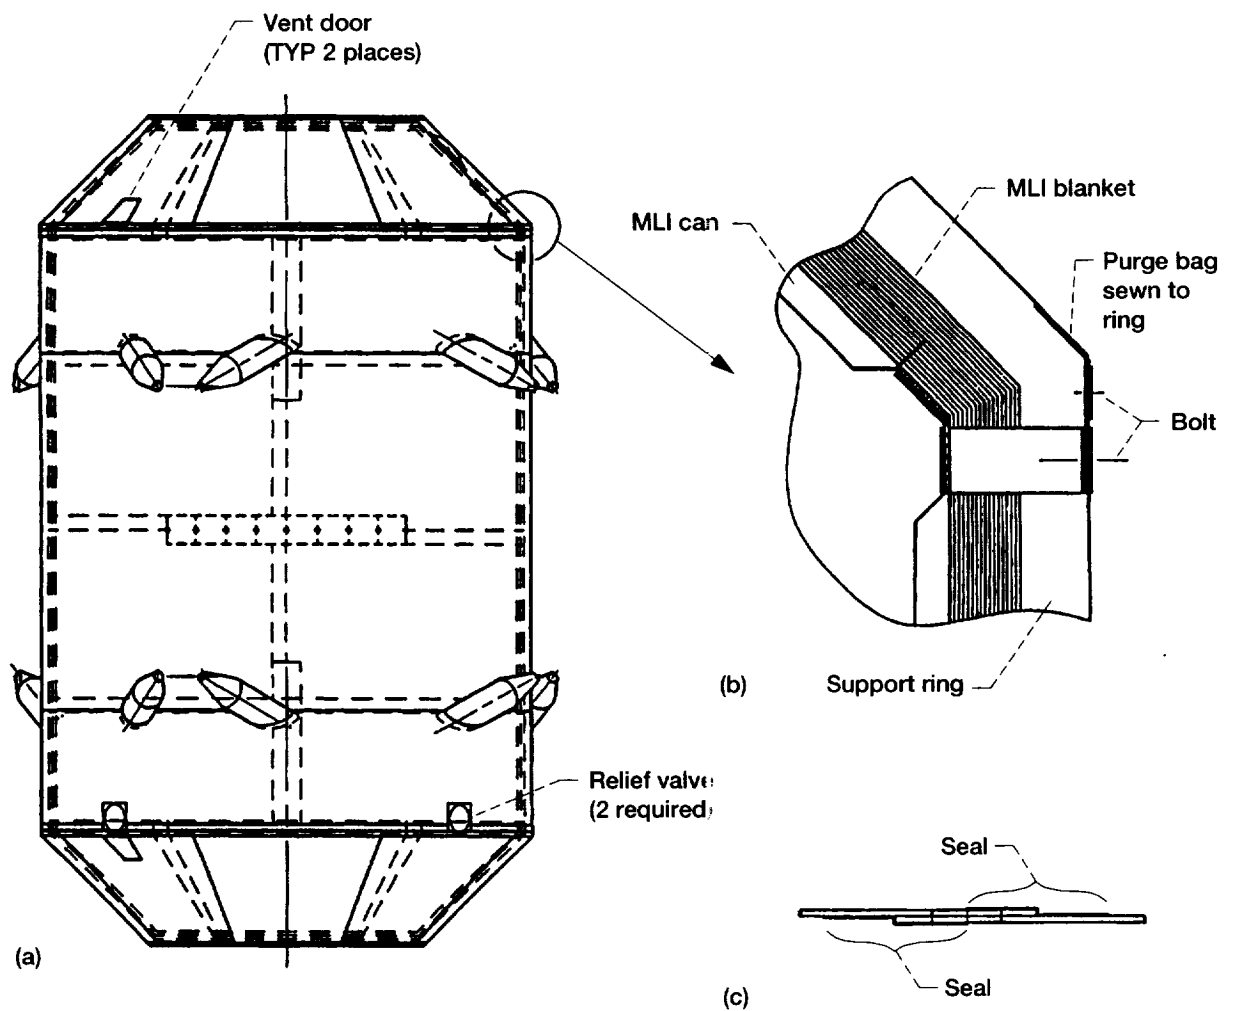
Supply tank purge bag. (a) Side view. (b) Enlargement of corner view. (c) Illustration of typical sewn seam.
